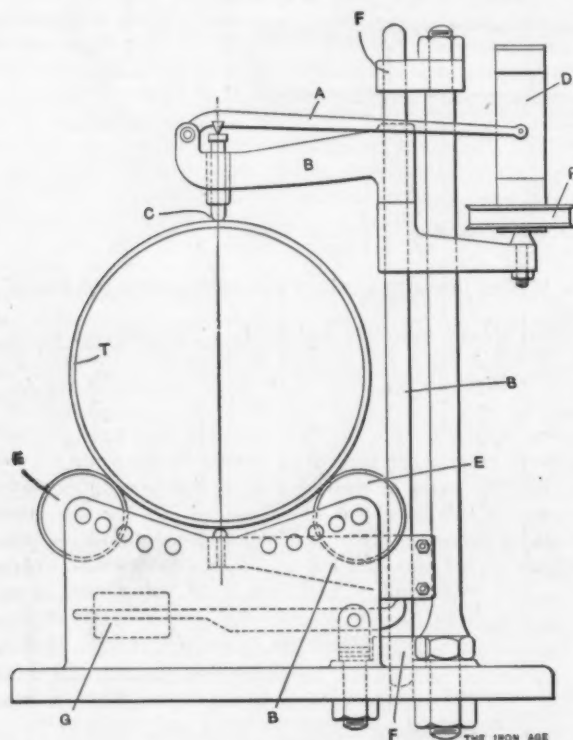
Autographic Calipering Apparatus for Measuring the Out-of-Roundness of Tubes.
